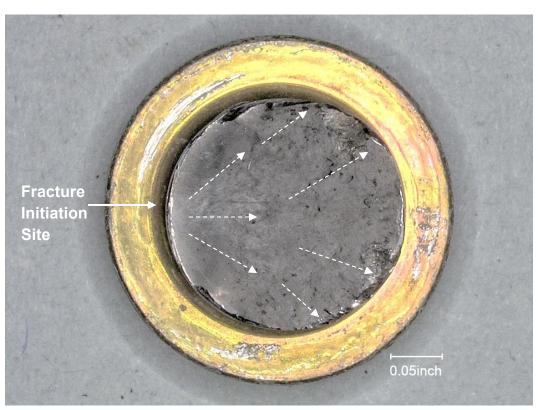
Fracture surface of the recovered bolt. The fracture initiation and direction are noted (arrows).
